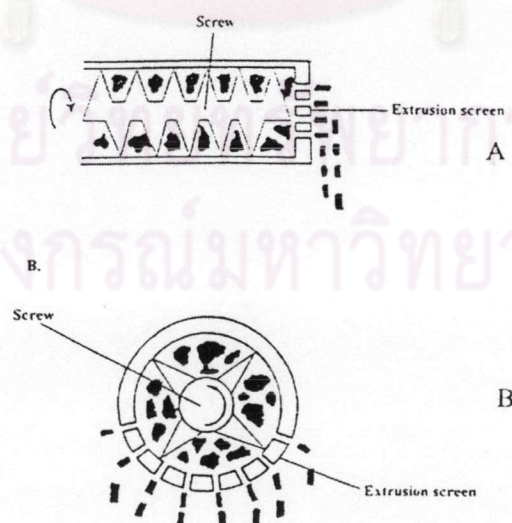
Schematic view of a screw extruder : A) Axial type; B) Radial type
